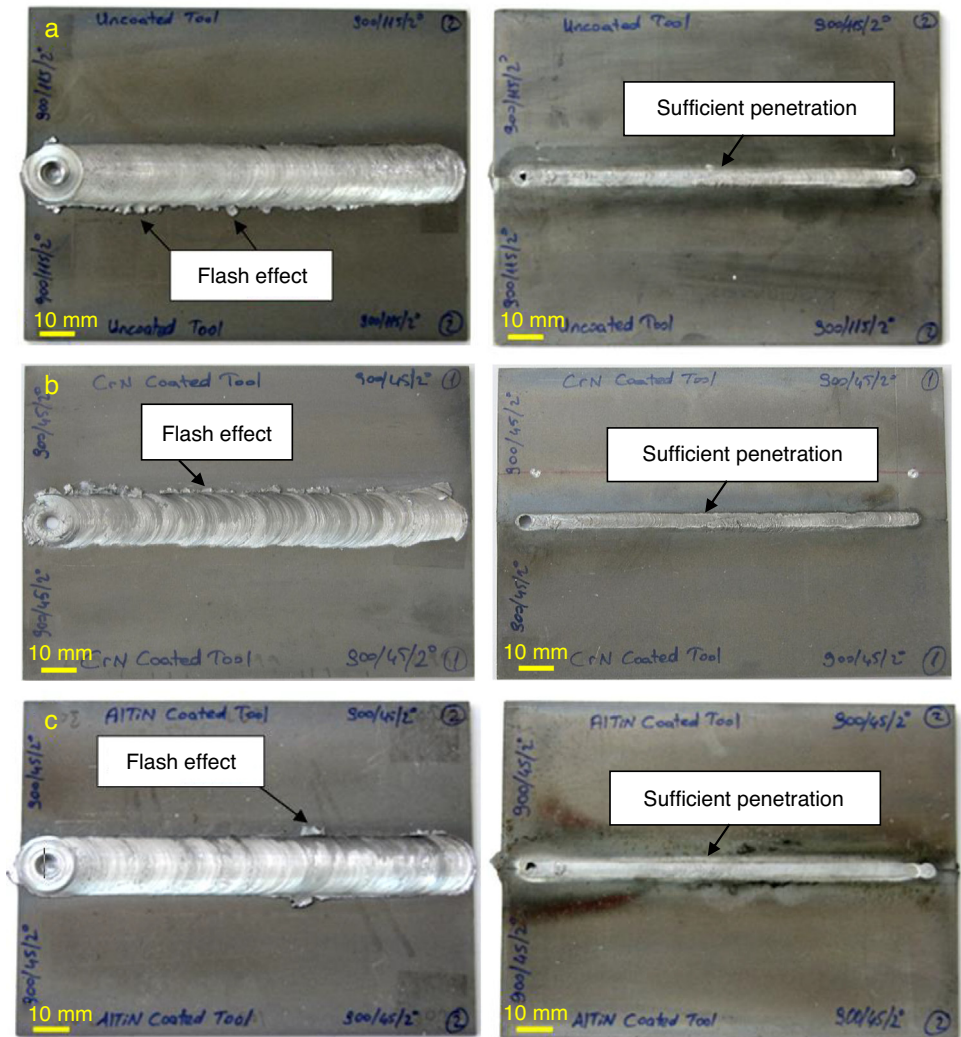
Appearances of top and bottom view after FSW: (a) Uncoated tool, (b) CrN coated tool, (c) AlTiN coated tool.
